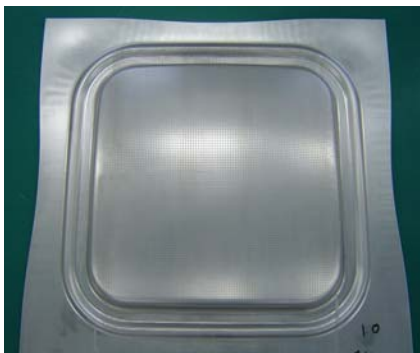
Test specimen to measure work-hardening for various forming conditions
